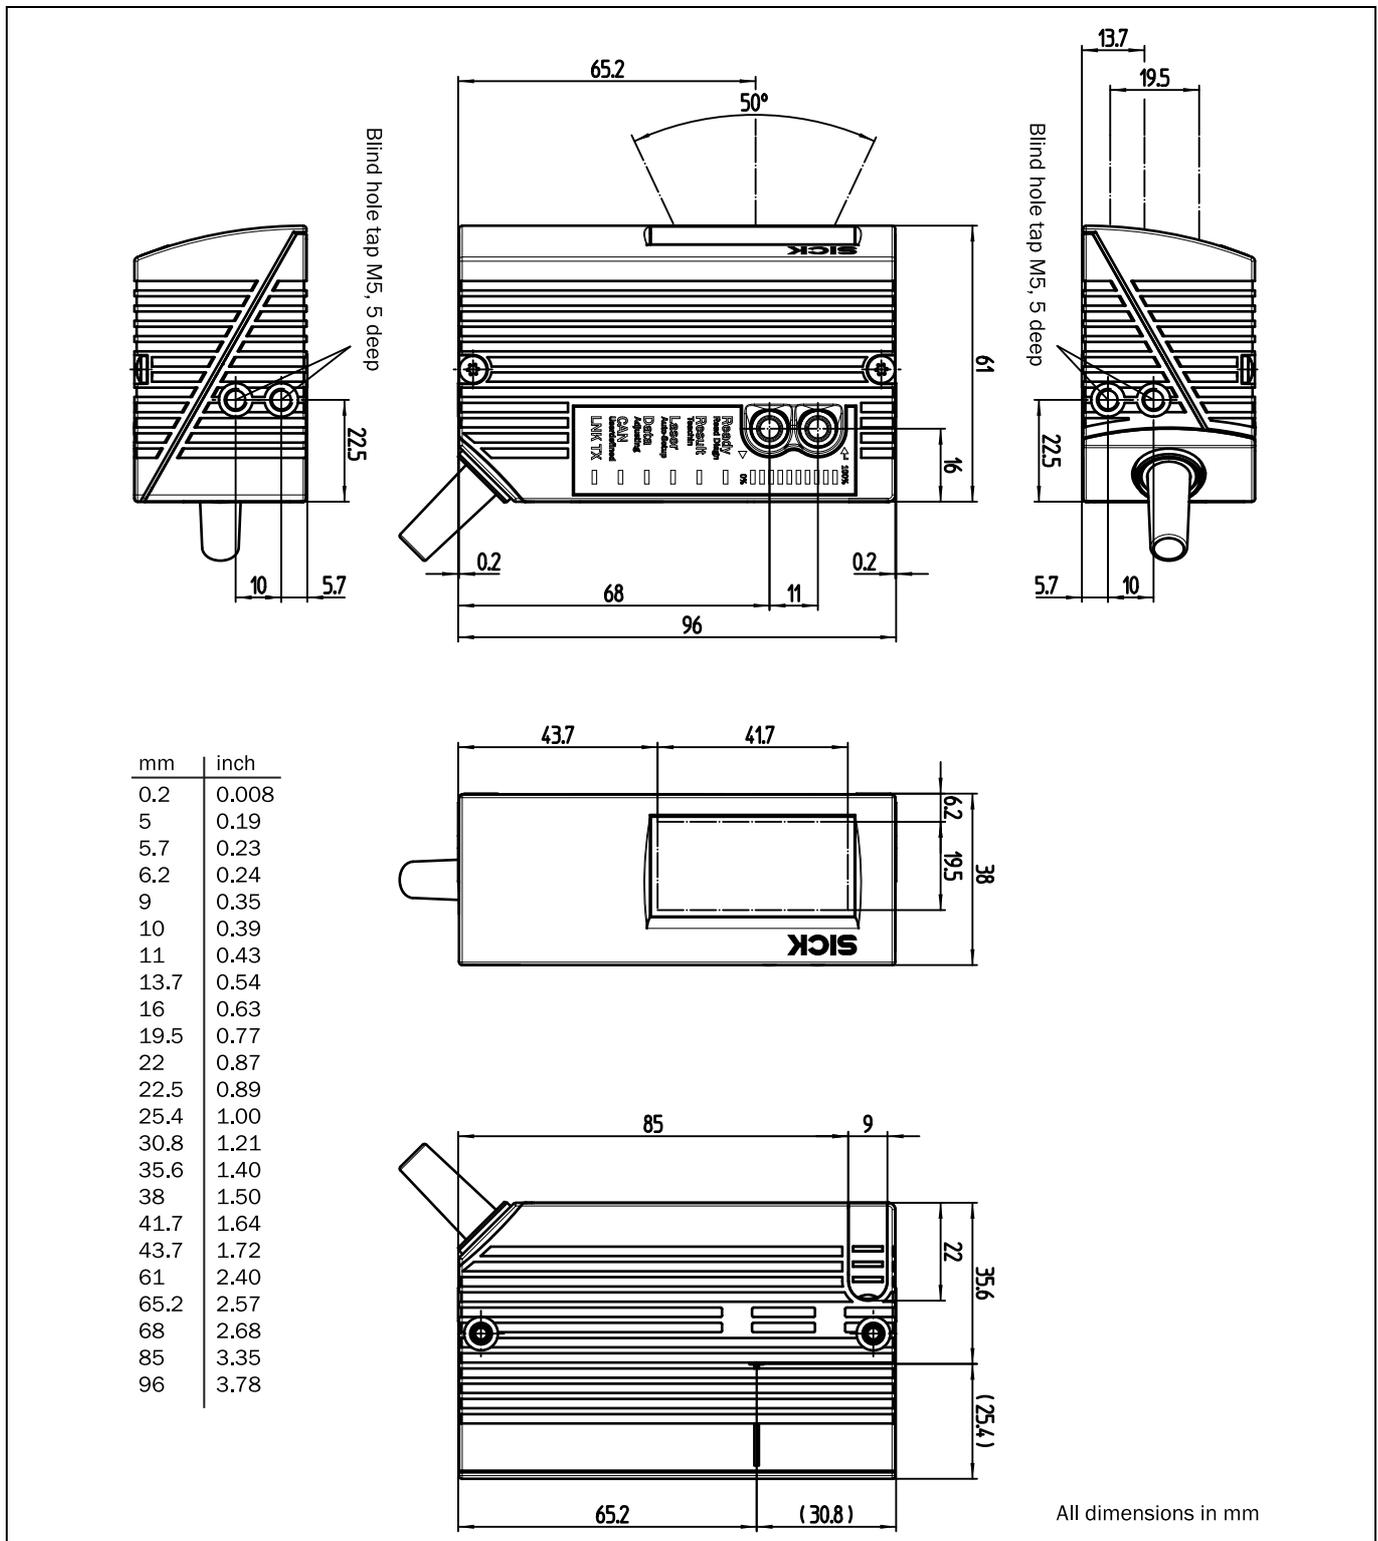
Standard version: Dimensions of bar code scanners with front reading window (CLV65x-0000)
